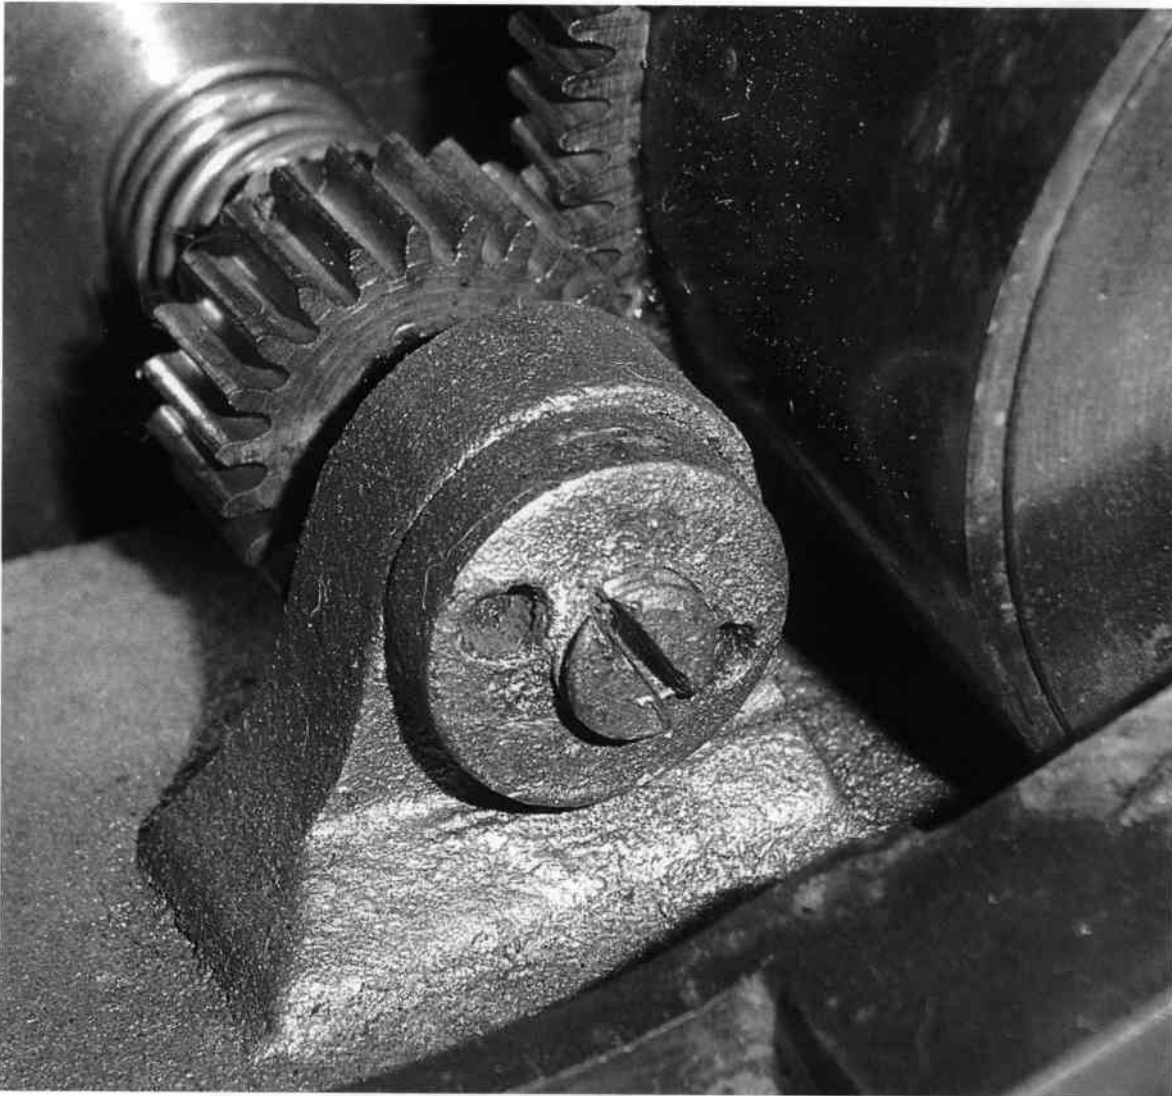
Adjusting slot of the screwed bearing, and its locking collar with two holes for tightening.
